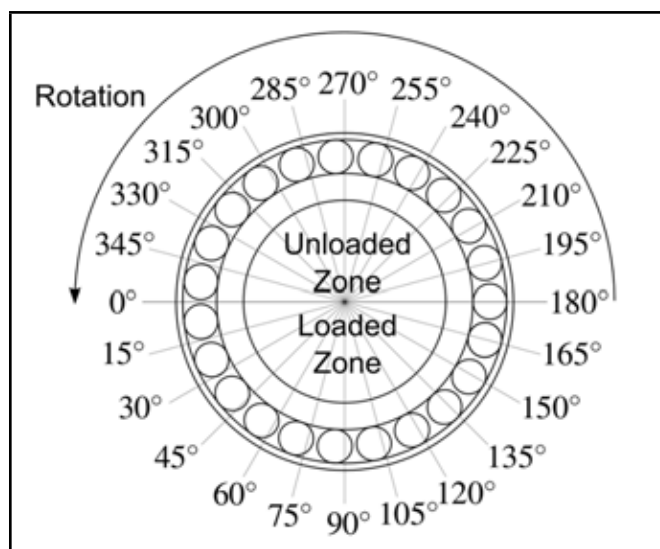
Spall placement diagram for bottom-loaded bearings (inverted for top-loaded bearings).
